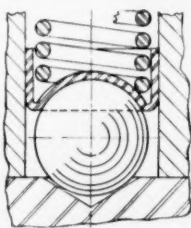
In this cross-sectional sketch of a ball valve, the spring cap actually becomes a cup which is free to slide in an up and down manner.
